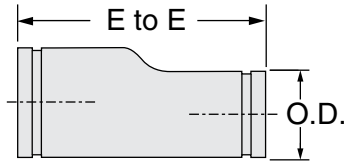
SS STAINLESS STEEL ECCENTRIC REDUCER
